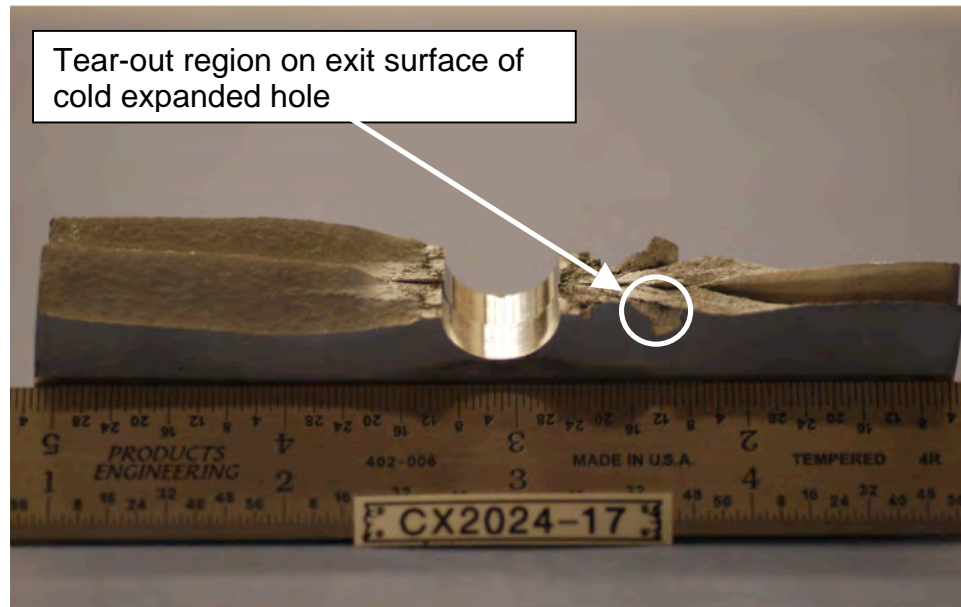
CX 2024-17 cold expanded specimen pair fracture surface showing the unique tearing of the exit surface due to the residual stress field caused by the cold expansion process. Specimen was tested at a $\sigma_{\max} = 22$ ksi, $R = 0.1$, $f = 20$ Hz, and lab air.
